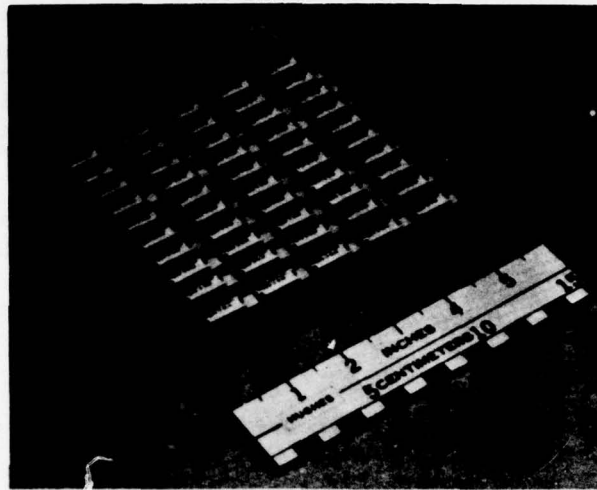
Hughes-developed heat pipe card with DIPs installed
